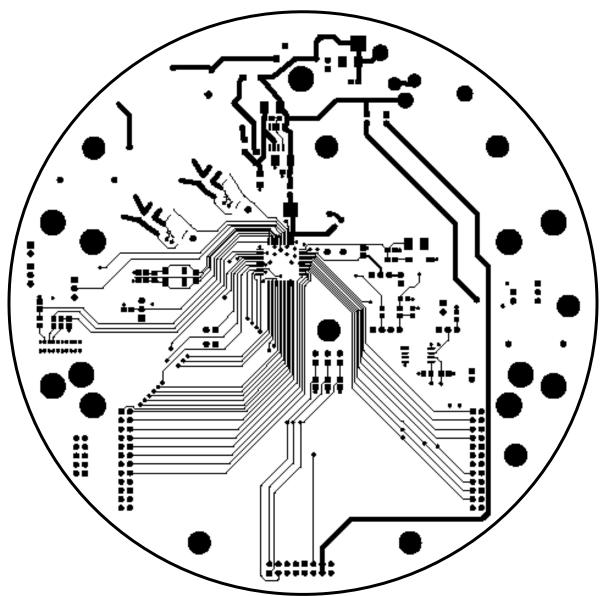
71M6511 4-Layer Demo Board: Top Signal Layer
